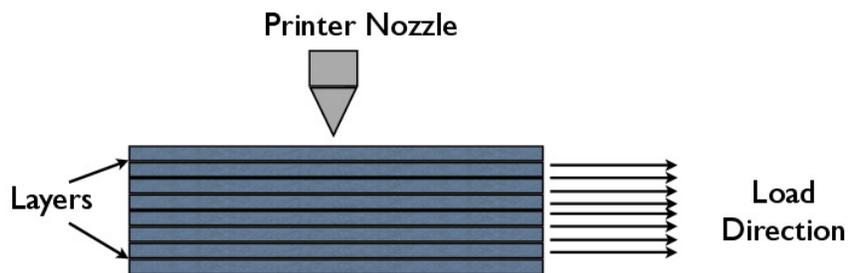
Schematic of a printed bar showing the layer direction and the load direction. The printer nozzle is drawn for reference.
